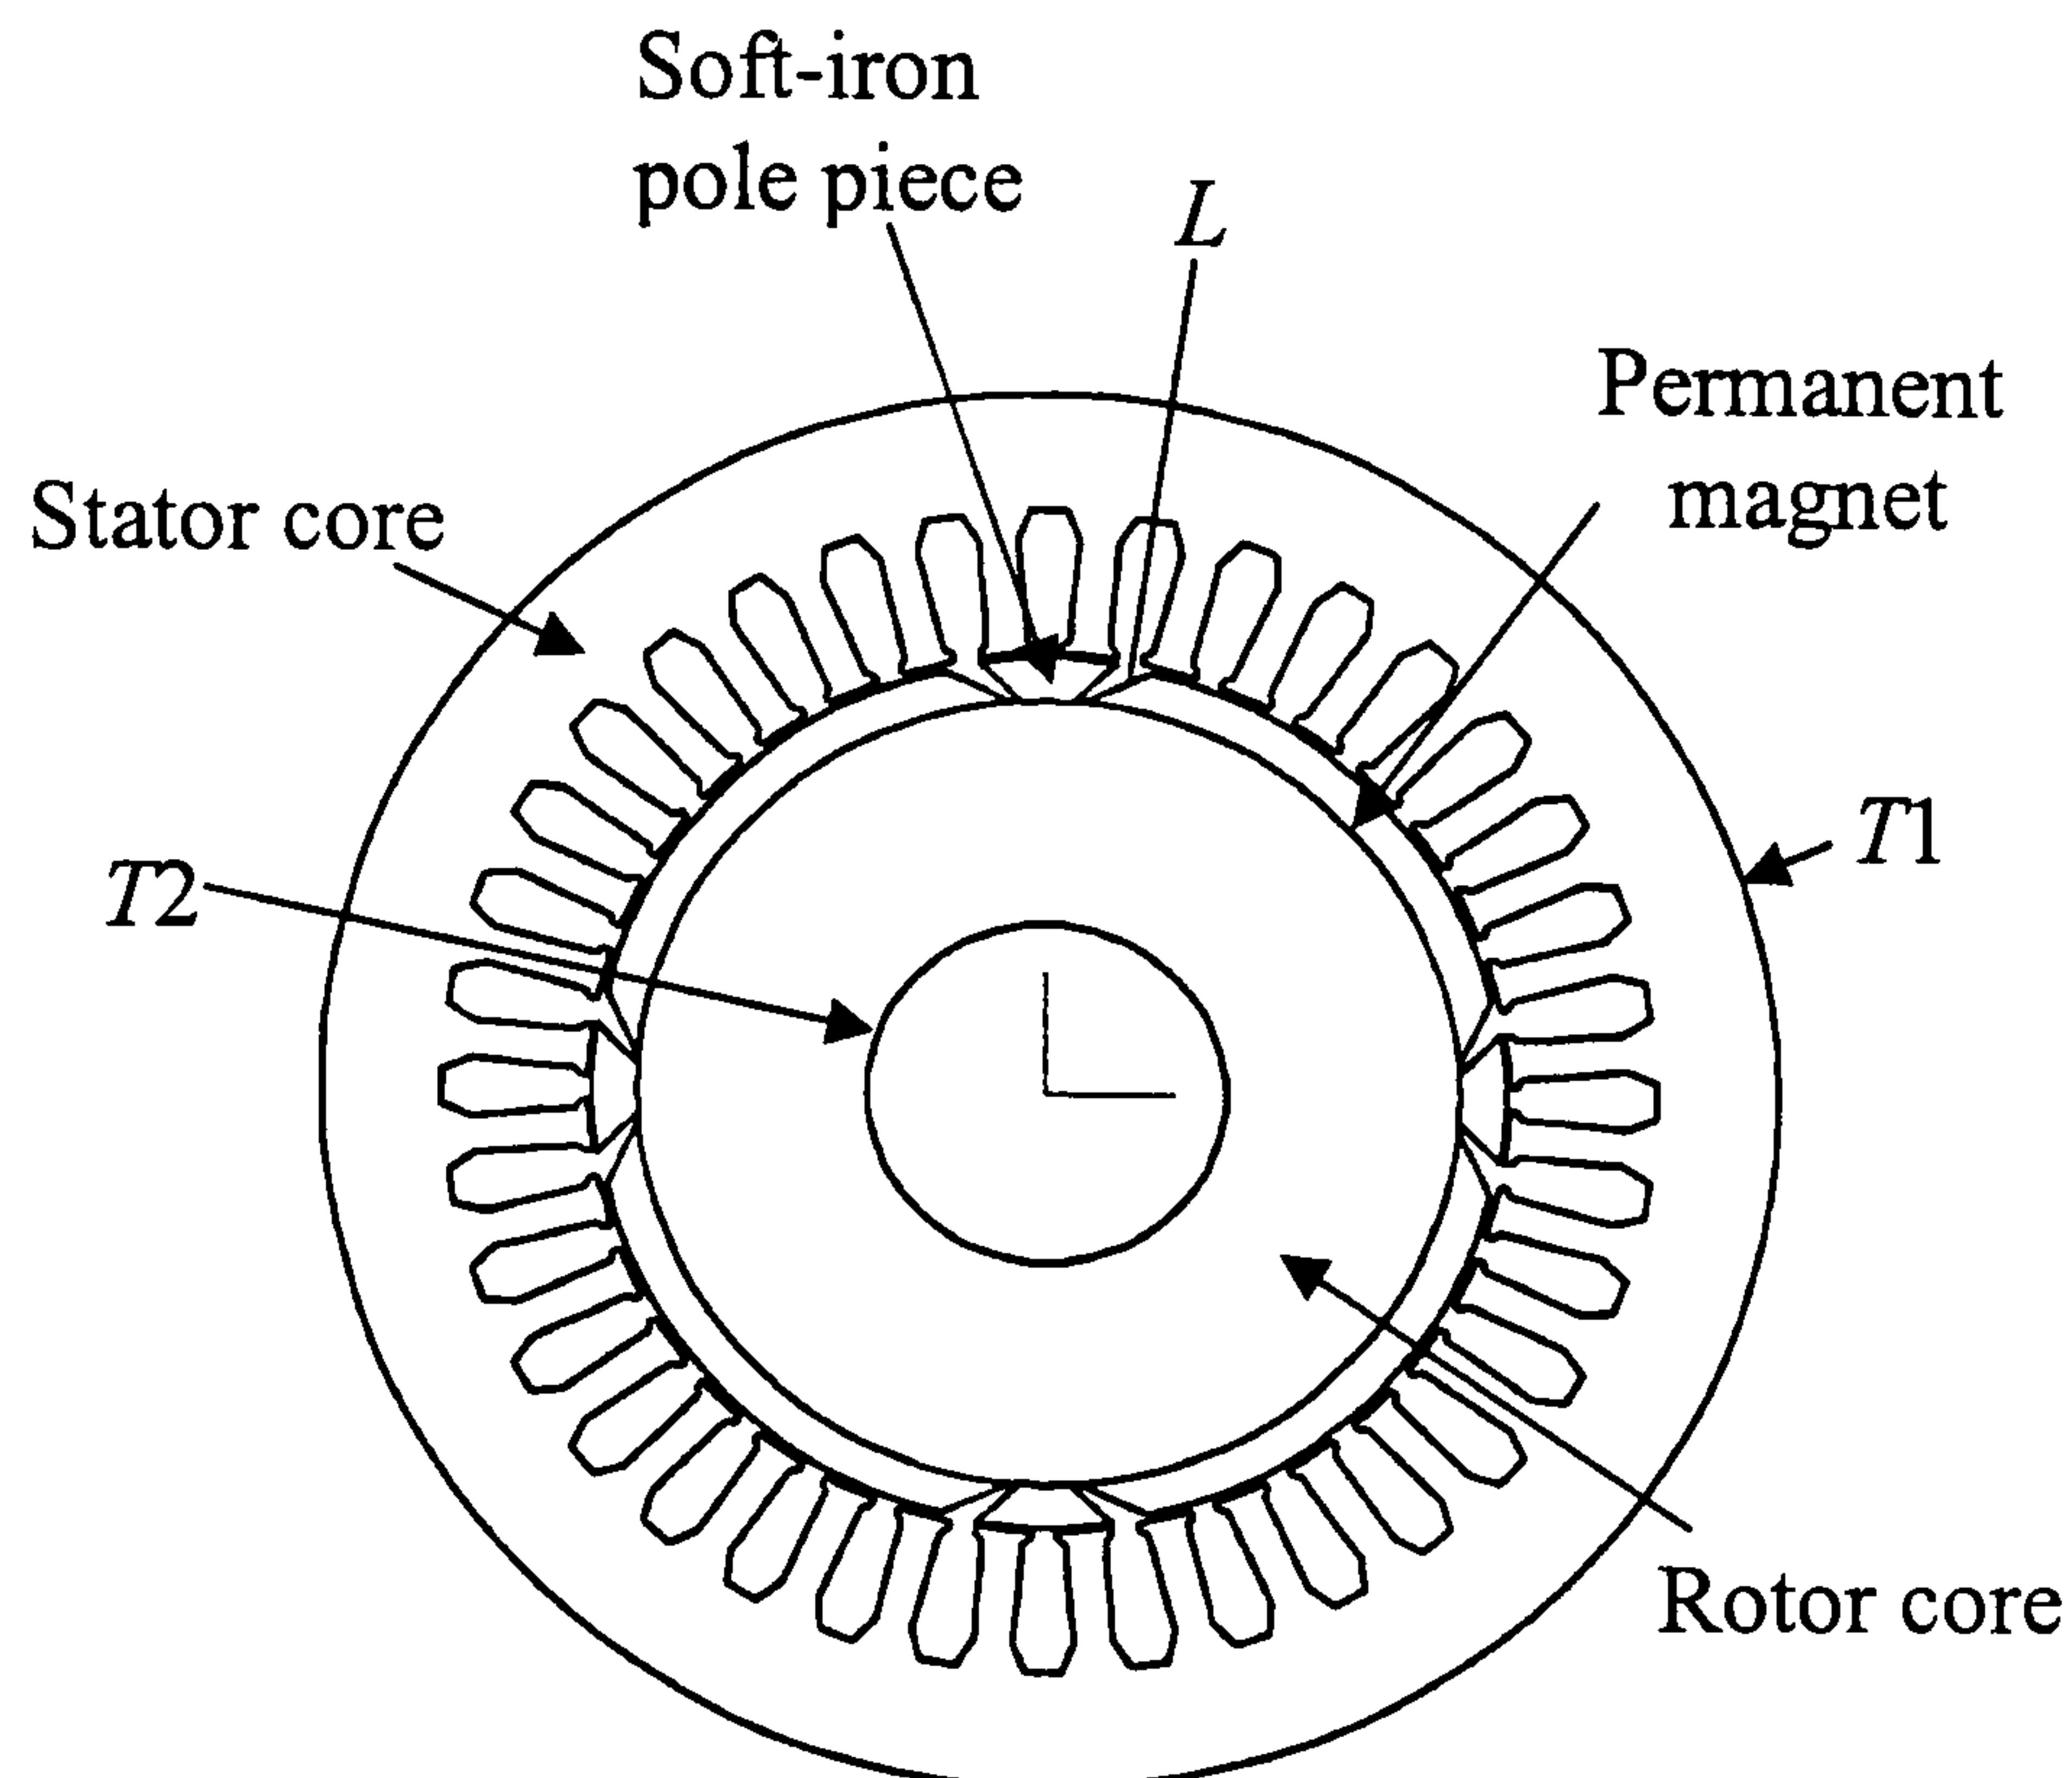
Cross-sectional view of prototype PMSG with inset rotor construction.
